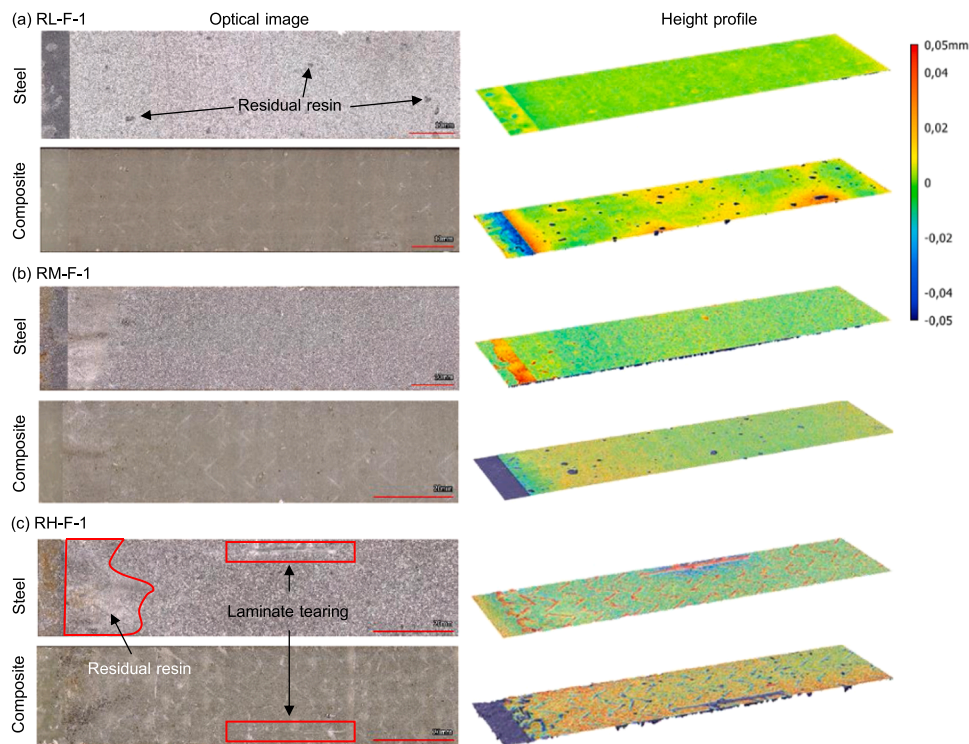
Representative fracture surfaces of fatigue tested specimens.
